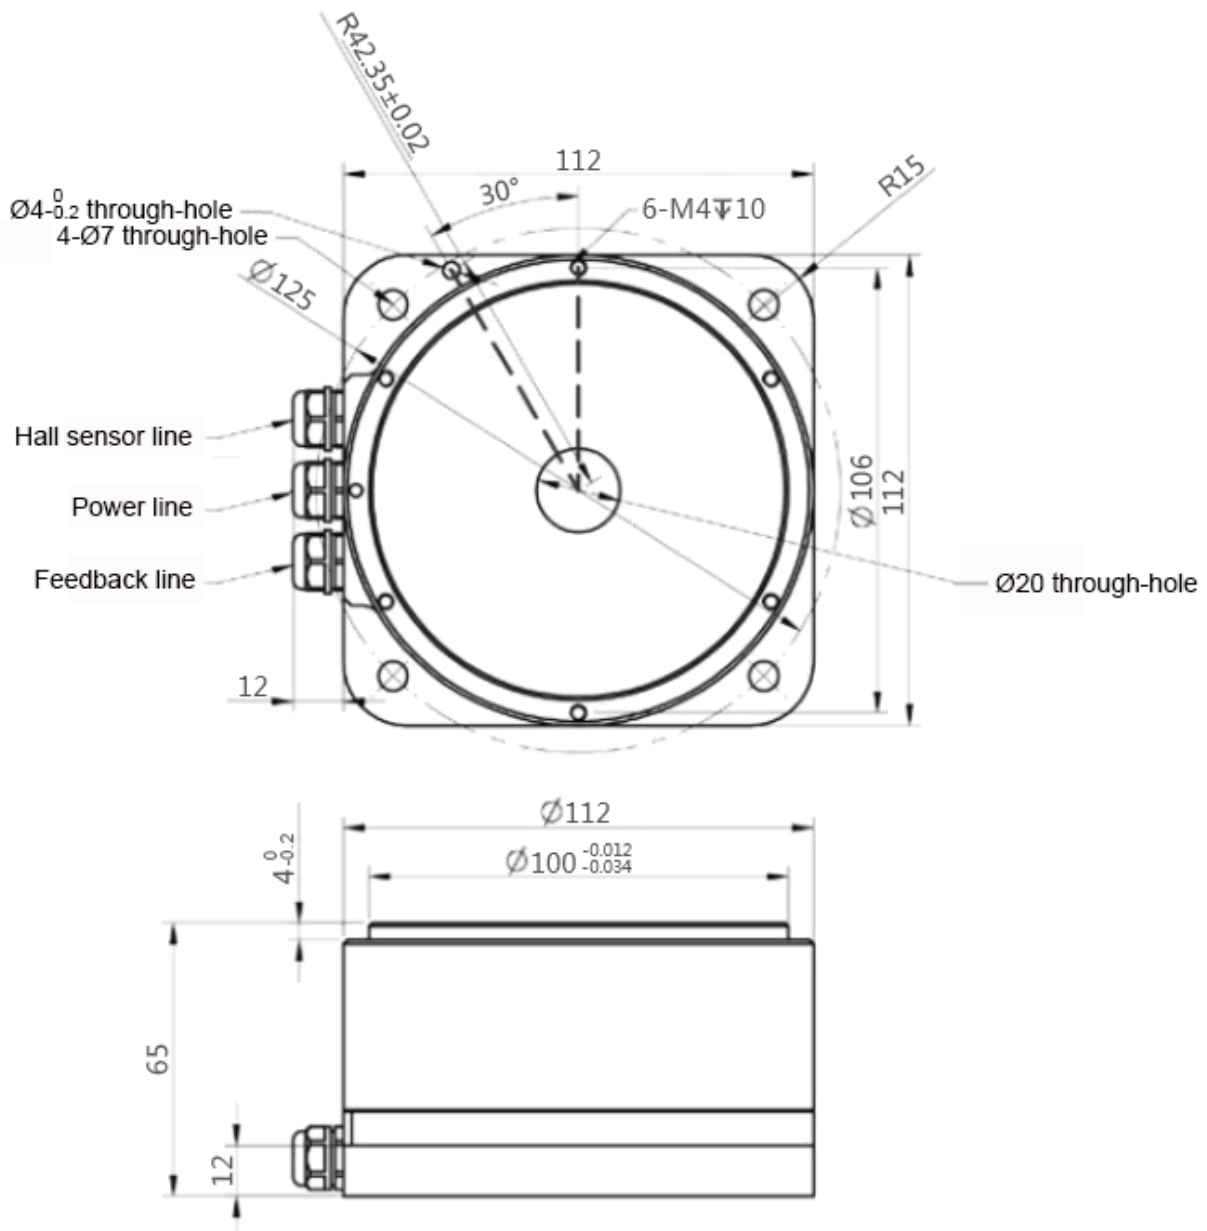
Outline dimensional drawing of WZCR-D112H-65 motor
